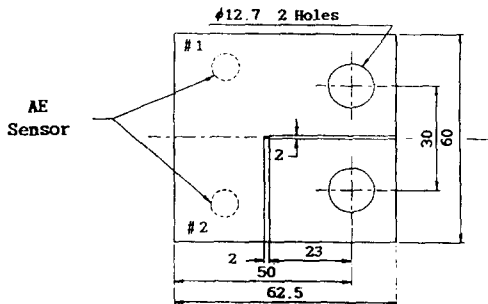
Dimension of specimen(CT) ; all dimension inmm
